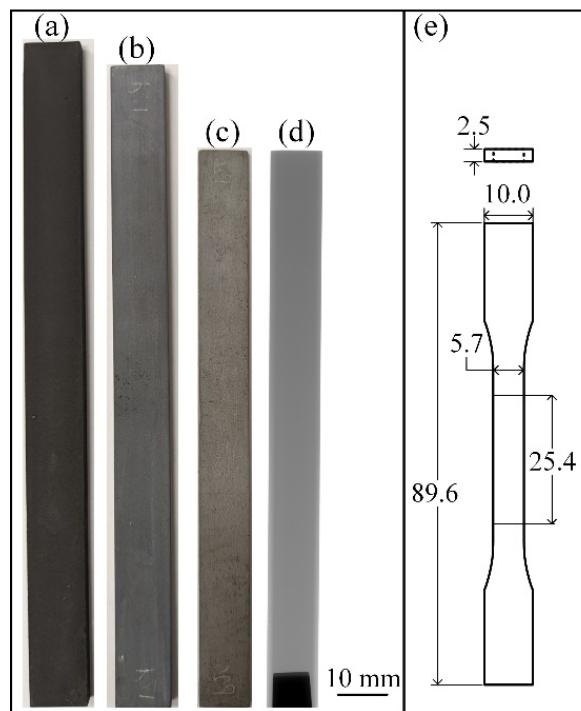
(a) Injected, (b) debound, (c) sintered, (d) X-ray radiography specimens, and (e) sketch of the tensile test specimen (dimensions in mm)
